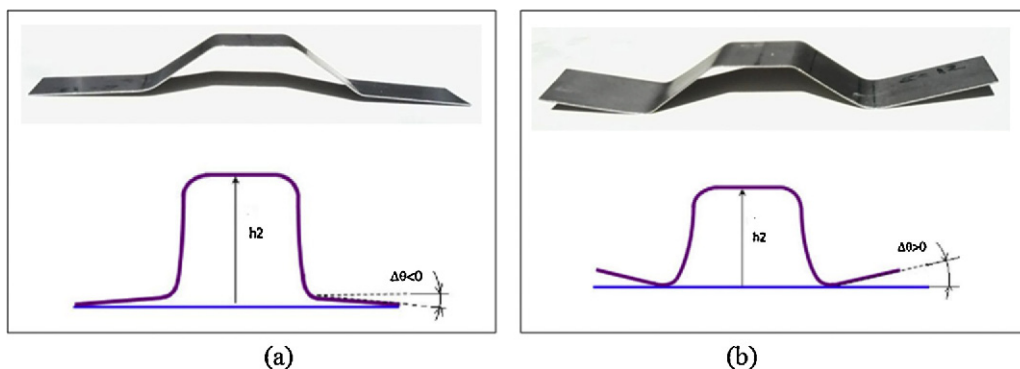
The two possible shapes of the deformable specimen after the removal of the tools.
